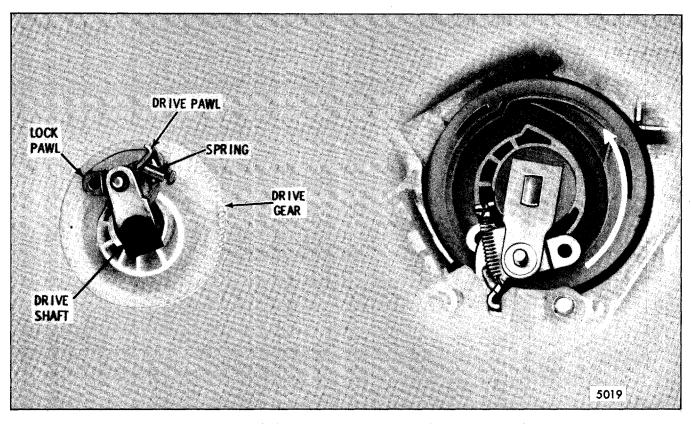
Lock Pawl and Drive Pin Positioning
